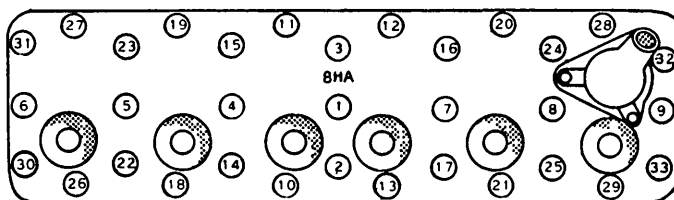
Cylinder head tightening sequence, 1947-51 Ford Six
